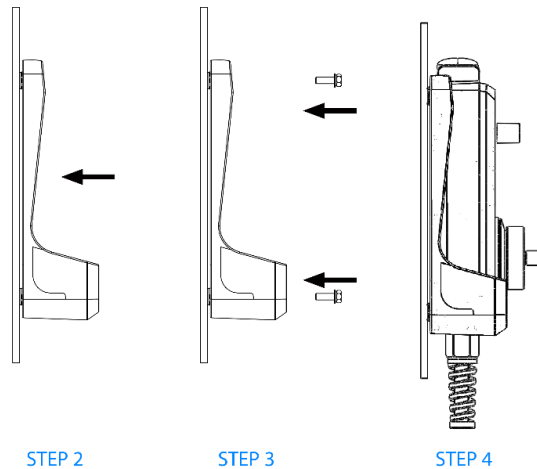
Mechanical Mounting of AMI5000 Remote Pendant
